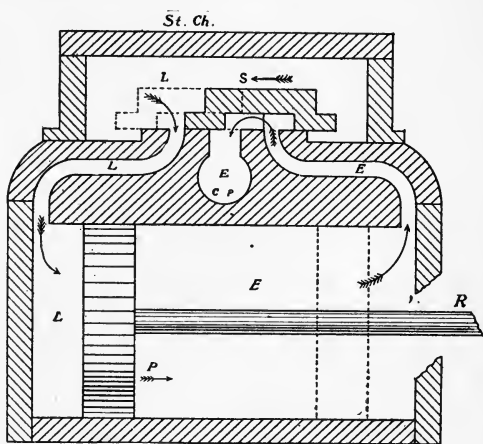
FIG. A. ESSENTIAL PARTS OF A STEAM ENGINE.
